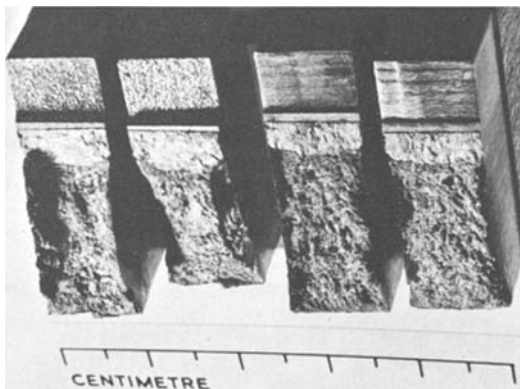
Fracture surfaces showing machined notch, spark machined regions, fatigue pre-cracked surface, fracture surfaces and shear lips.
